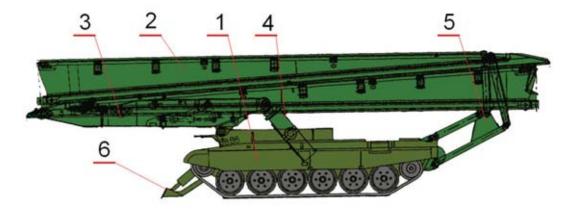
PMC-LEGUAN bridge: 1-base vehicle, 2-bridge span, 3-laying arm, 4-laying arm cylinder, 5- span main bracket, 6-auxiliary blade (support)
